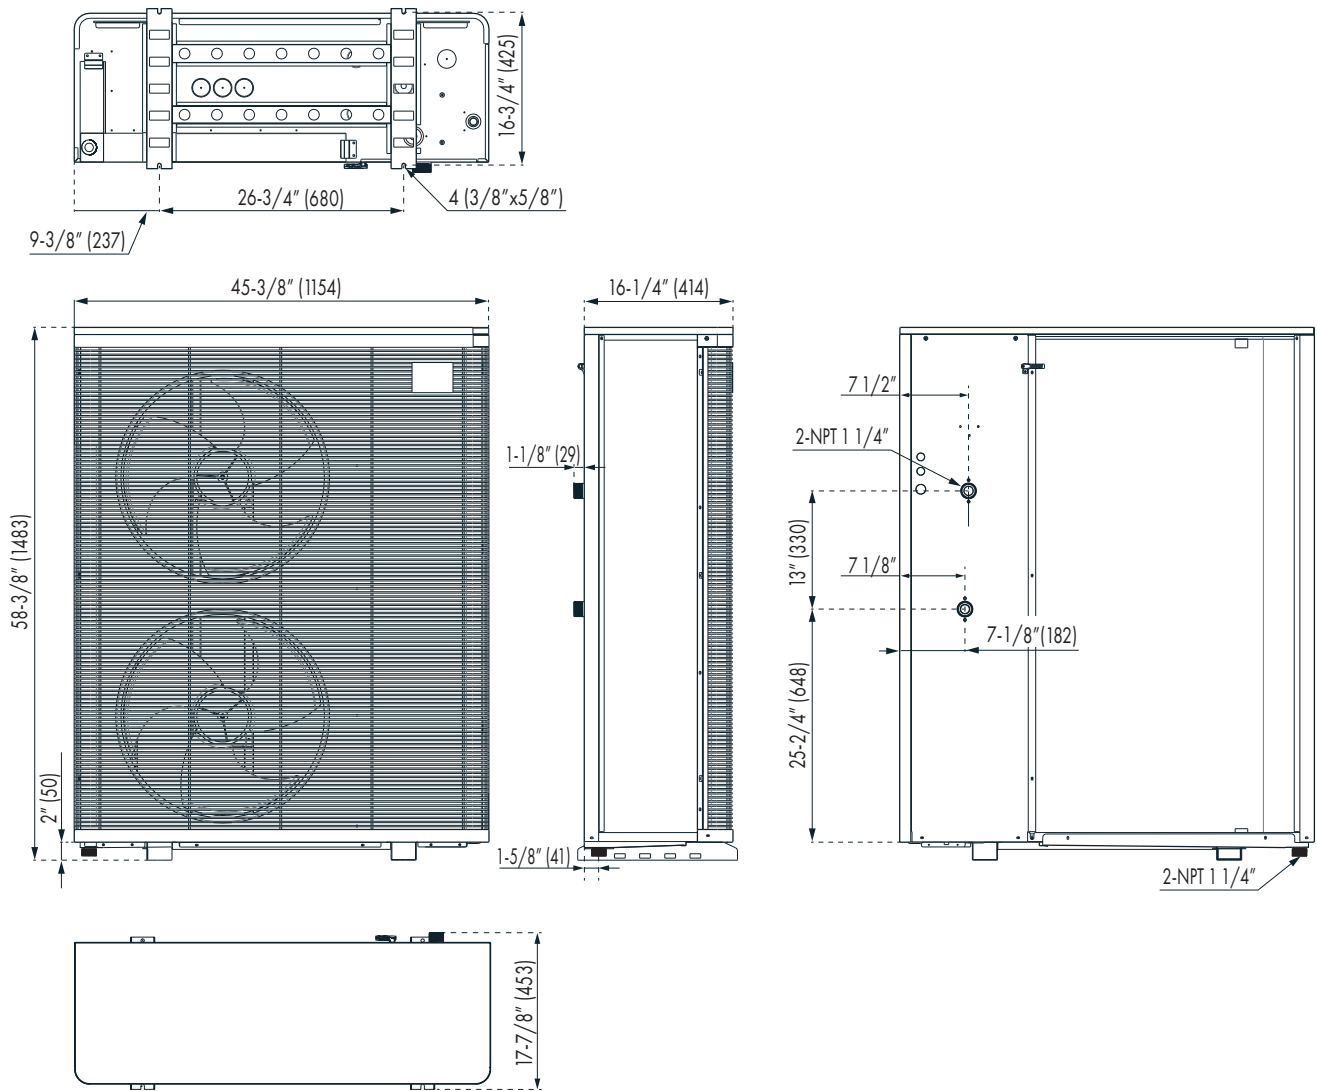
Outdoor Unit Dimensions -NHP32-060
